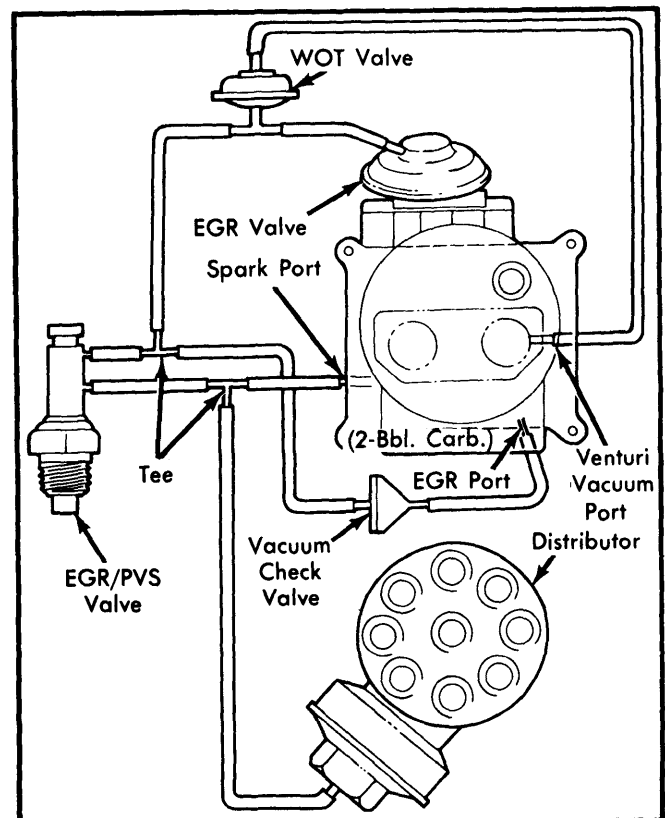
Typical EGR Installation with Vacuum Load Control (WOT) Valve
